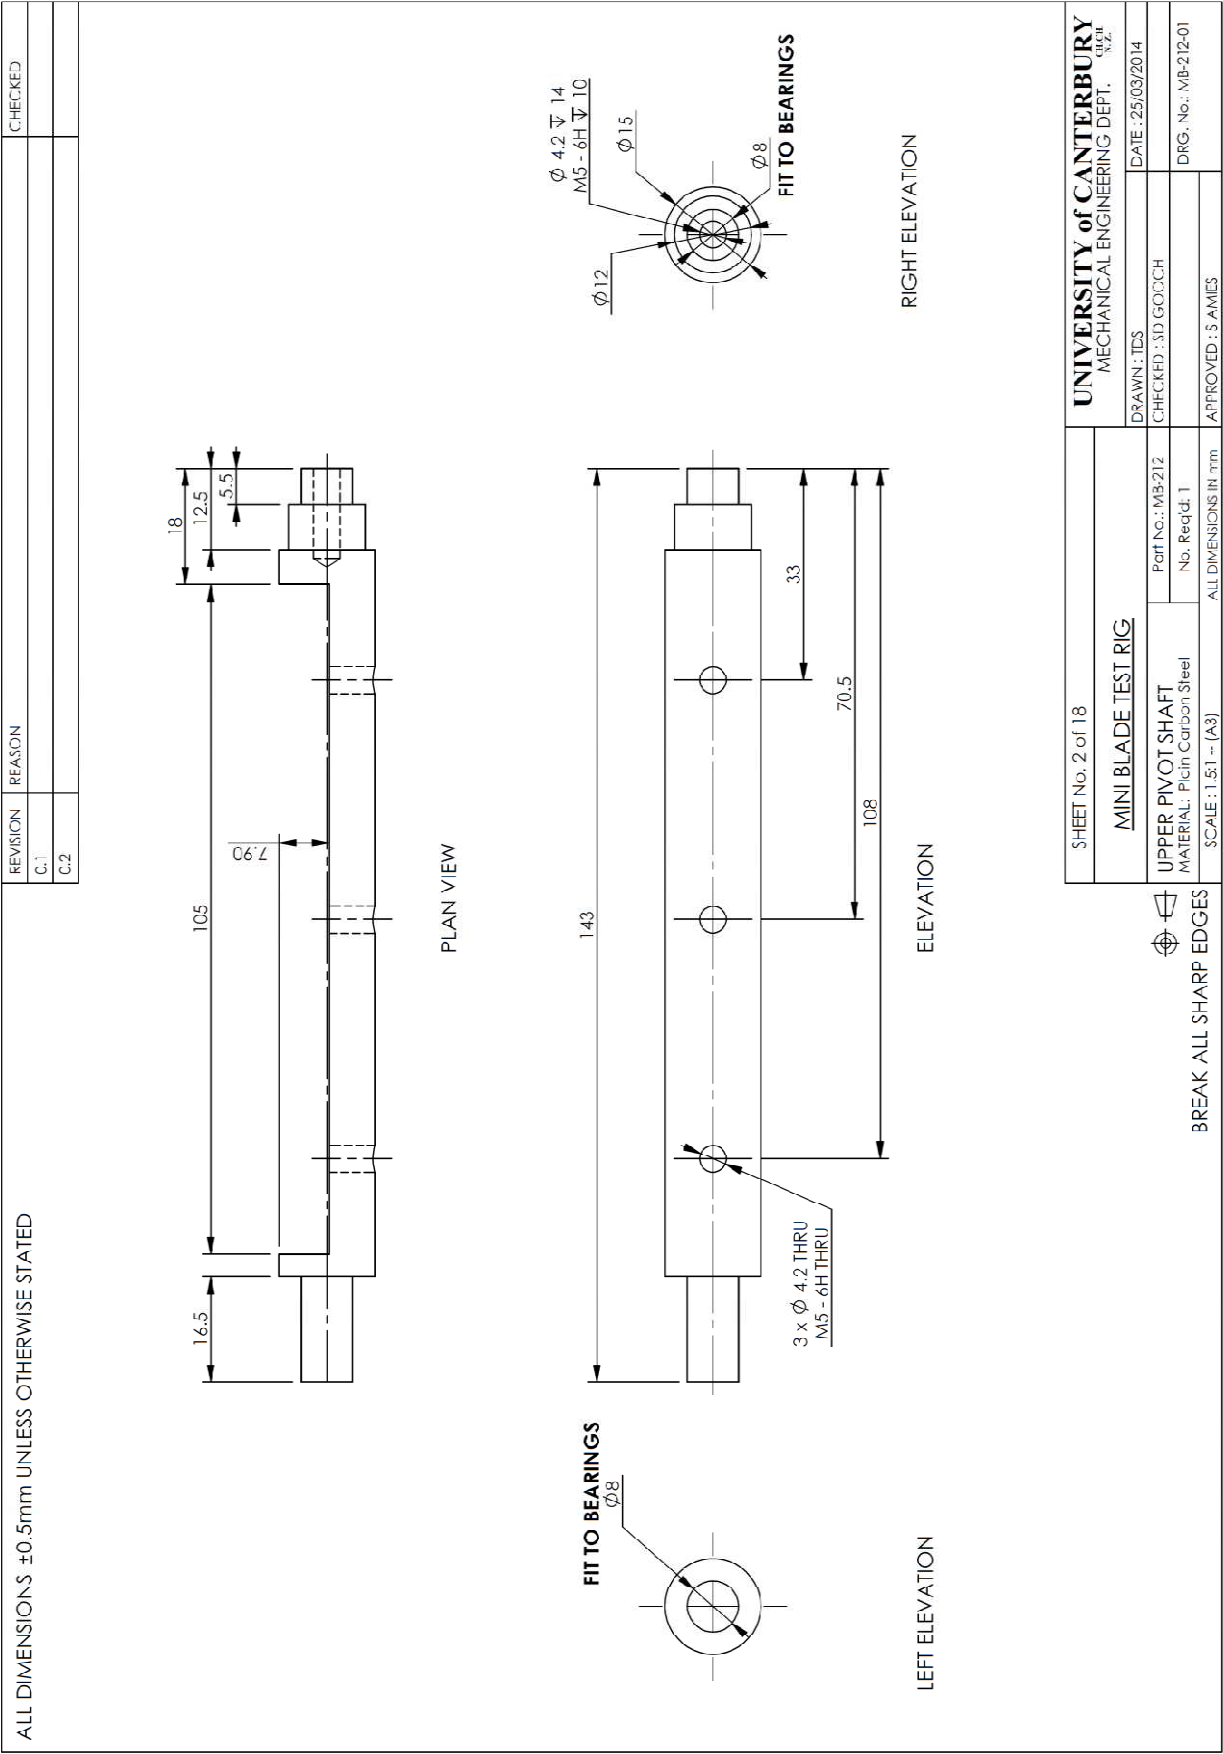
Manufacturing drawing for the upper pivot shaft in variable stroke mechanism test rig.
